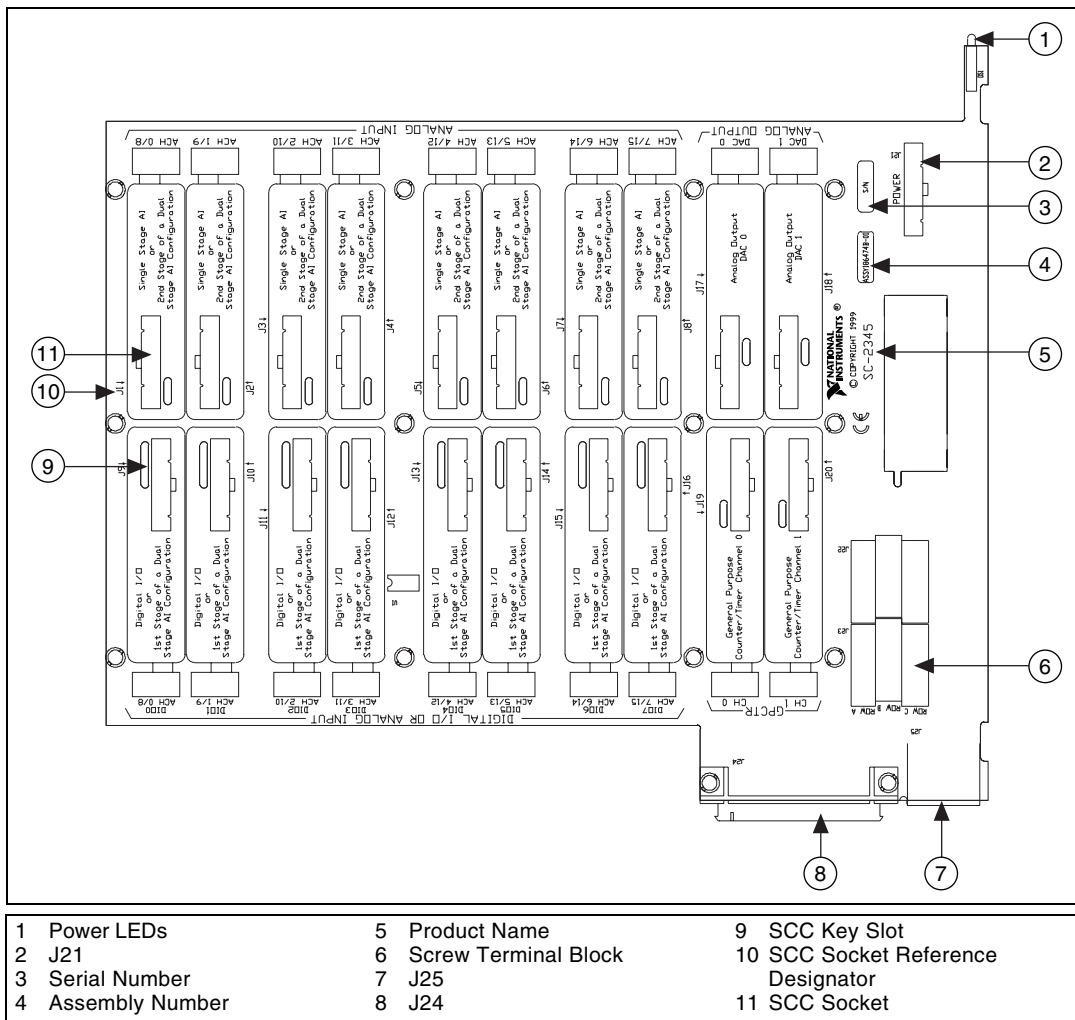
SC-2345 Configurable Connector (Rear Cabled) Board Parts Locator Diagram
